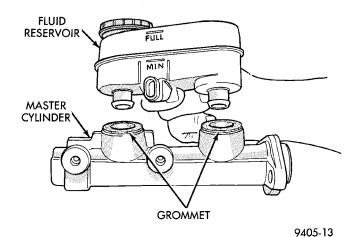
Removing Fluid Reservoir From Master Cylinder
